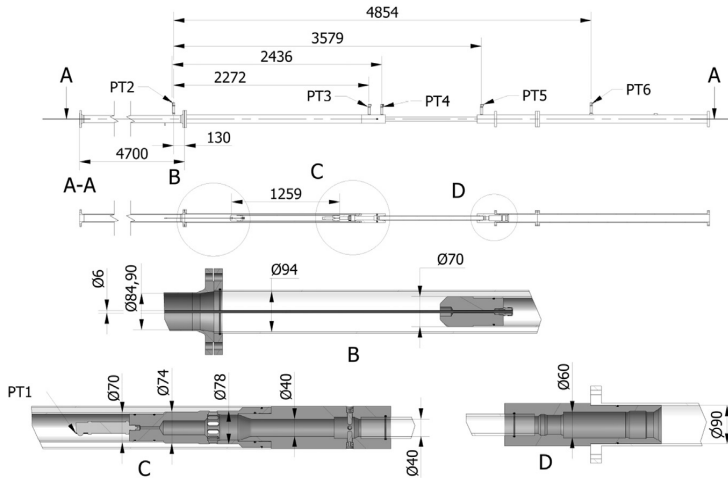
Laboratory mock-up of STC shut-in valve. Dimensions in millimeter [mm].
